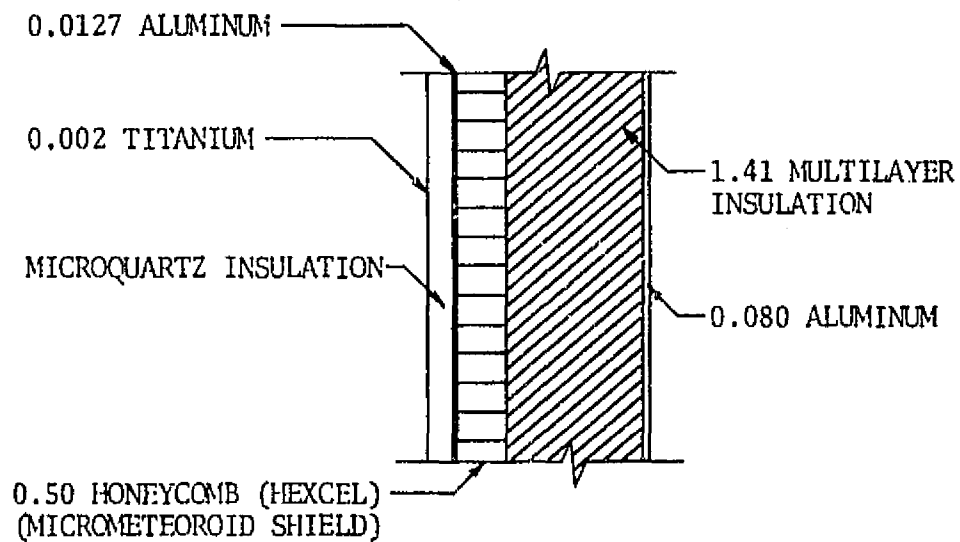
SPACE TUG SIDEWALL CROSS-SECTION
